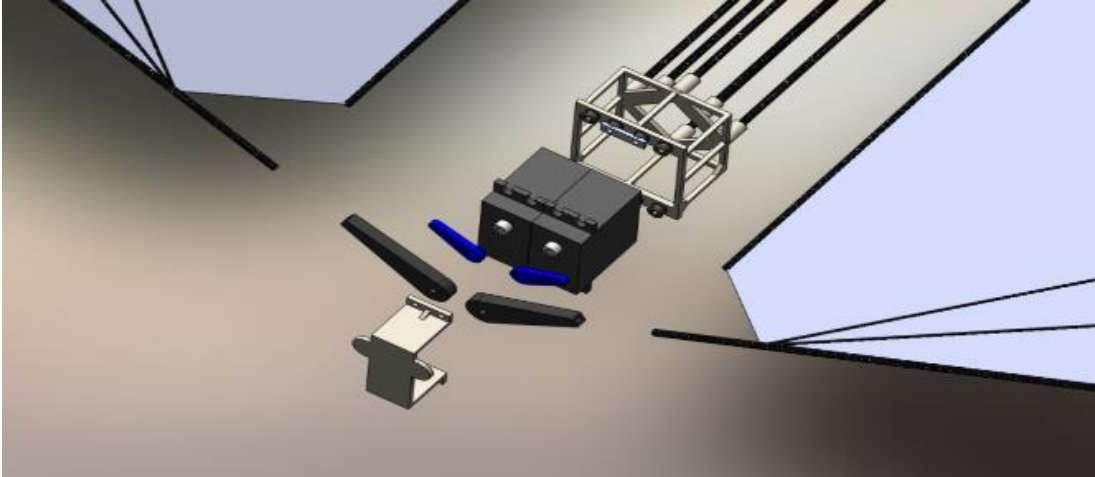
Exploded view of nose piece, wing mounts, servo horns (blue), servos, servo housing, and carbon fiber fuselage (left to right). Wings are shown on edges.
